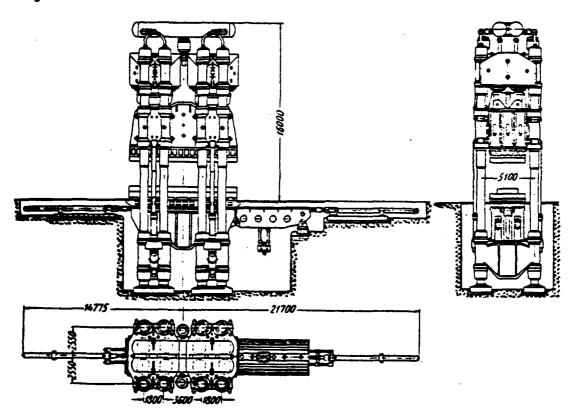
Eight-cylinder hydraulic stamping machine 30000 t. General view.
